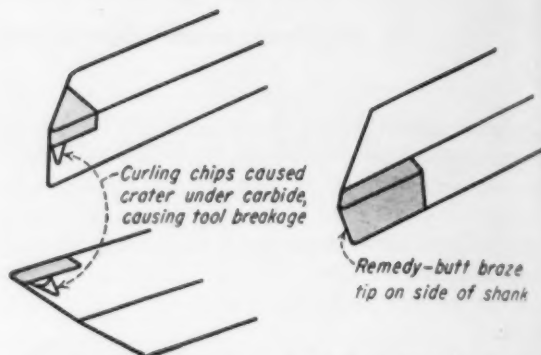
Butt-brazing a carbide tip on the side of the shank enabled the carbide to act as a wear plate as well as a turning tool in lathe application.
